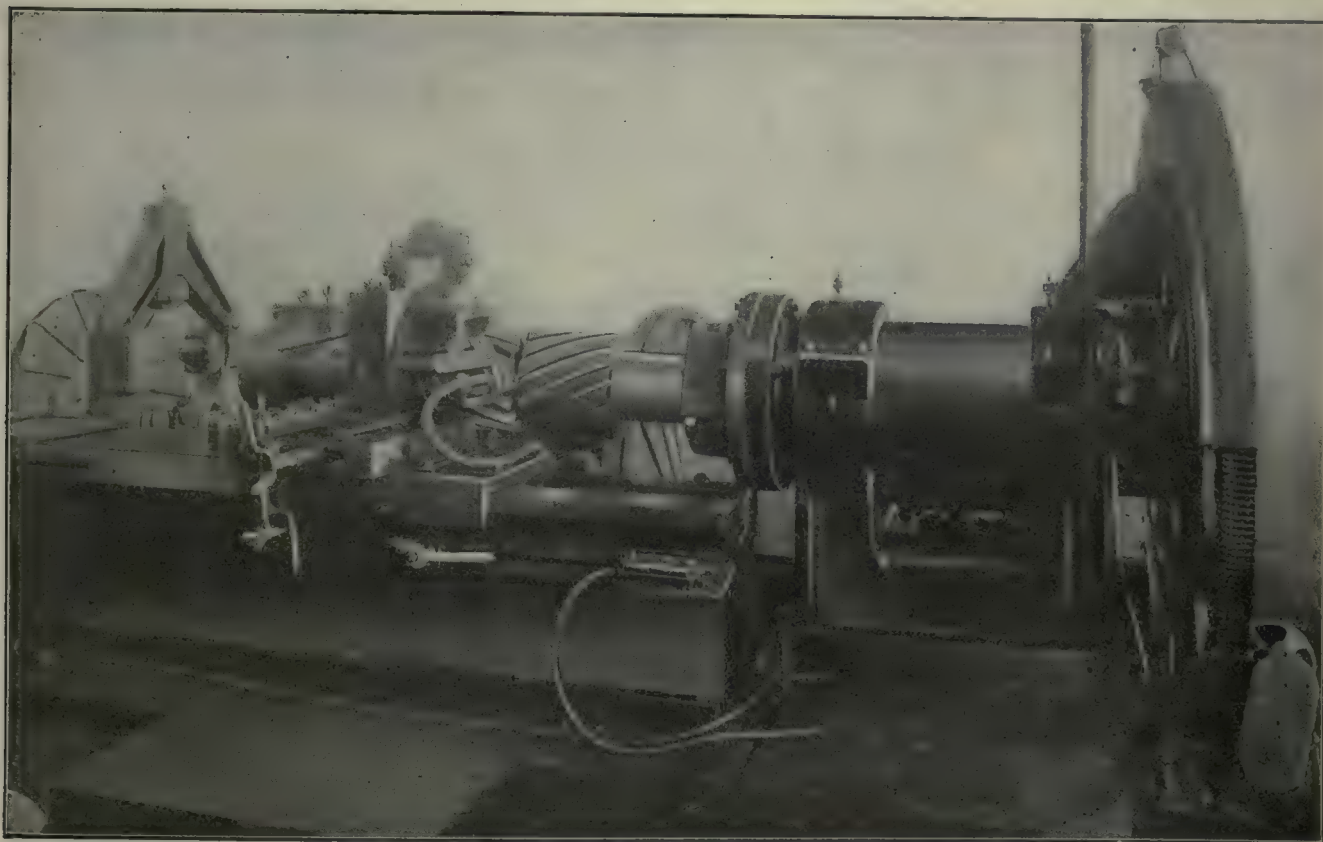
FRONT VIEW OF ELECTRIC-DRIVEN HERRINGBONE-GEAR PLANER
